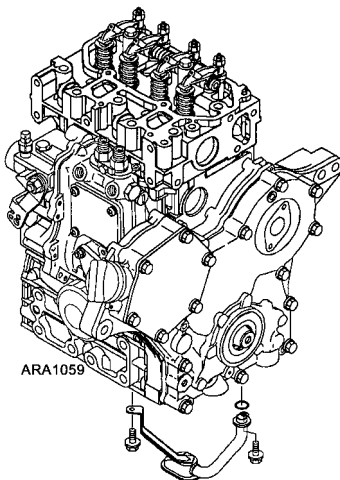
Install Oil Pump Intake Pipe (Two Cylinder Engine)
